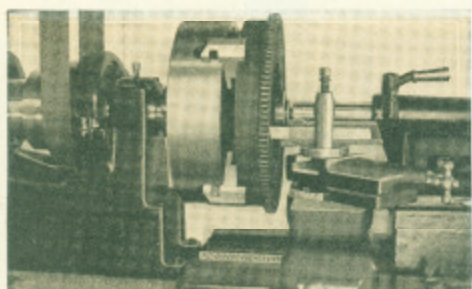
Removing Teeth from Flywheel, in One Cut, for New Ring Gear
